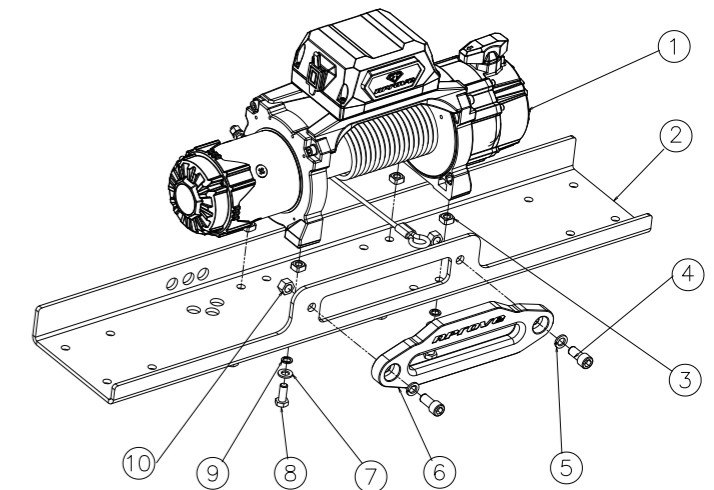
Figure A : Alu. hawse fairlead and winch attachment to frame (for D9500SR / D9500SRD / D12000SR / D12000SRD)
